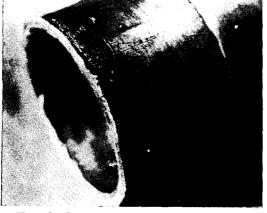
SLEEVE OF FAILED OPERATING ROD JOINT
